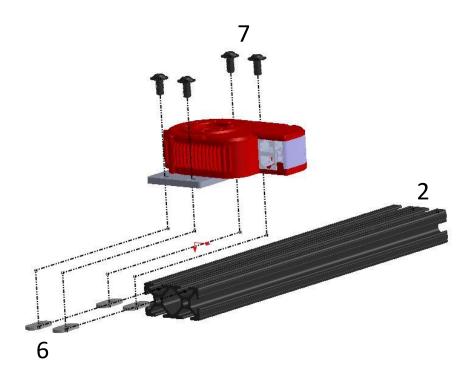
Attaching the Assembly in Fig. 1 to Aluminum Extrusion
